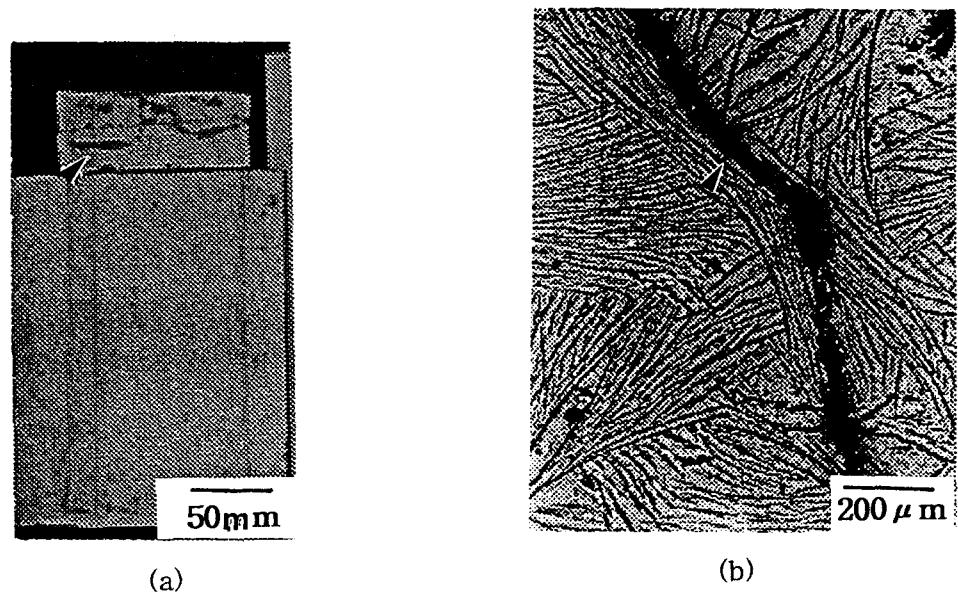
(a) Macrographic and (b) Micrographic appearance of cracked weld
